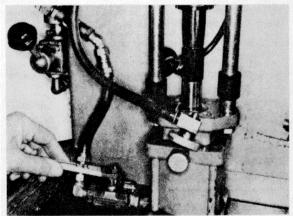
H-92. Closing the Hydraulic Valve to Clamp the Injector
